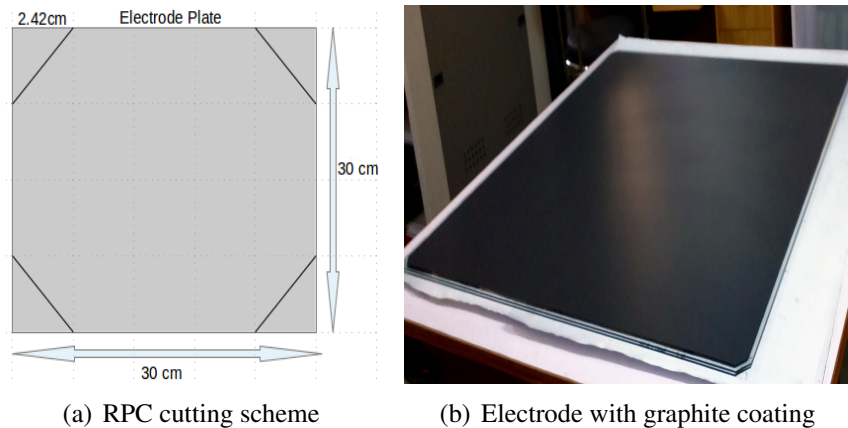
Schematic view of edge cutting of glass plate of dimension  $30 \text{ cm} \times 30 \text{ cm}$  and a sample glass electrode with graphite coating.
